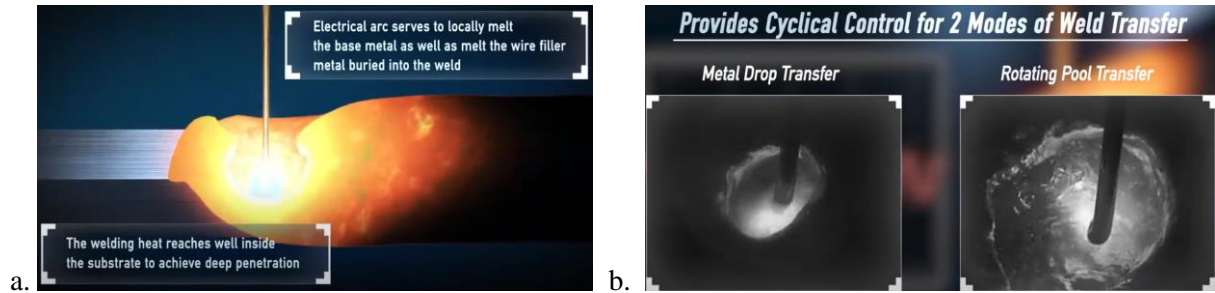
Details of D-Arc welding process; (a) Cross section of the D-Arc process, (b) cyclical control for 2 modes of weld transfer (metals drop transfer and rotating pool transfer)
